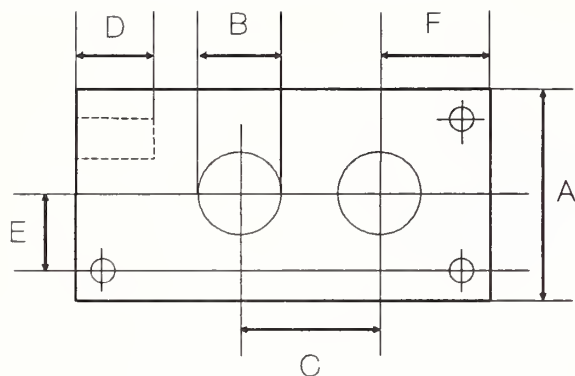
An Engineering Drawing Representation of the Principal Geometrical Dimensions of a Manufactured Discrete Part
